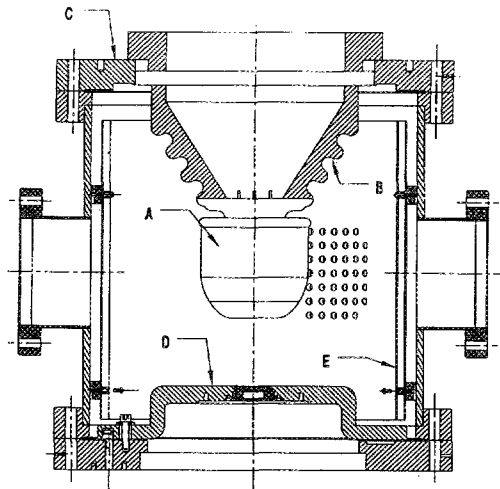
Cross-sectional view of the 100 kV Schottky electron gun. The optic module (a), containing the emitter and lens elements, held on the insulator (b) which is welded to a 14-in. conflat flange (c). For beam alignment, the anode element (d) is movable. Two concentric magnetic shields (e) provide external field immunity.
